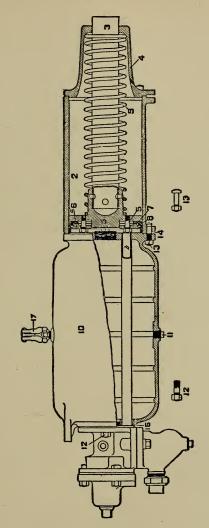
Triple Valve Auxiliary Reservoir and Brake Cylinder Combined.
